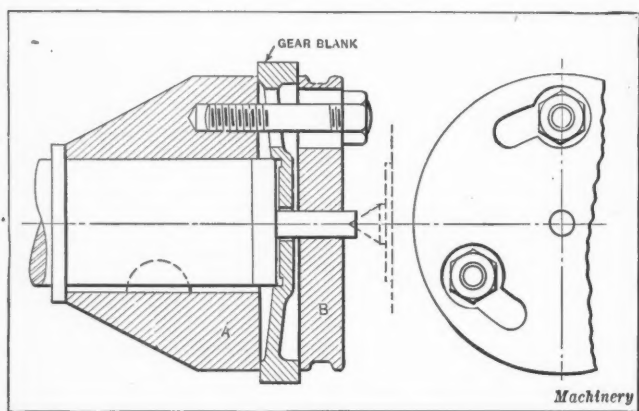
Method of holding Helical Gear Blank on a Lees-Bradner Machine
